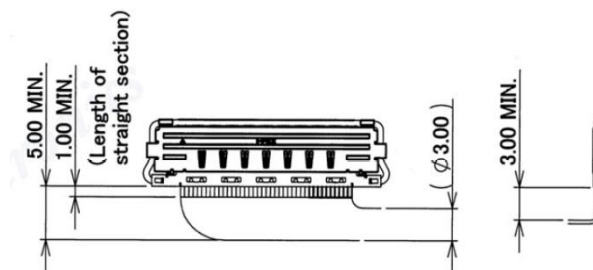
Locking Position of Cable on Base Board CAM A Connector
